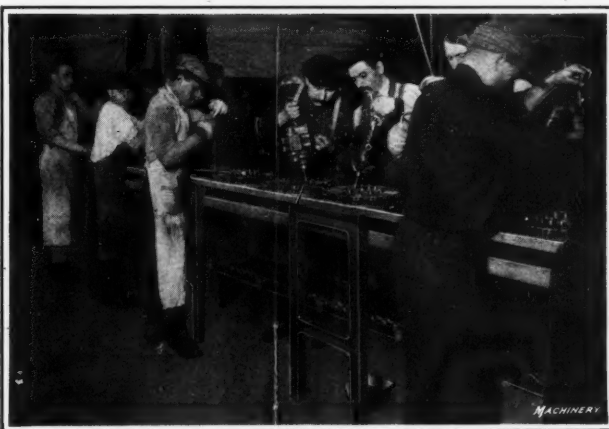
In this case the magnetic generator unit of the motor is carried on an endless belt conveyor, and men with power-driven wrenches are screwing up the nuts. Attention is called to the large number of men at work; this is typical of the intensive production methods in the Ford Motor Co.'s shops
